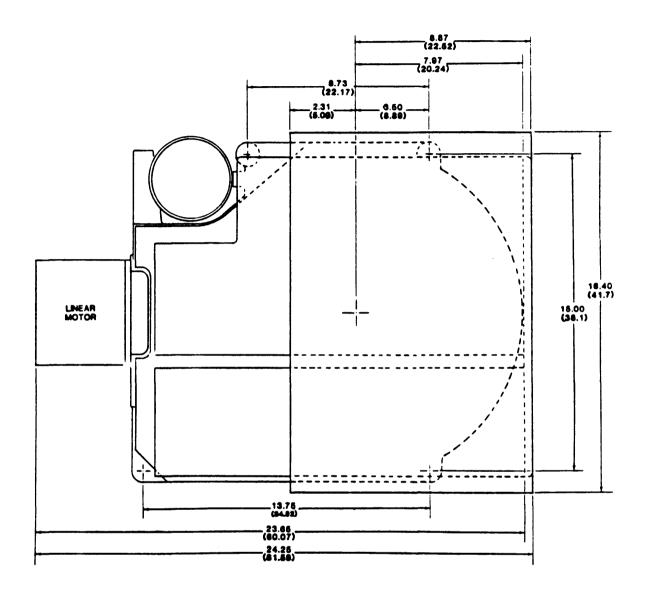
B. AMS Basic Drive Dimensions (Side View)
